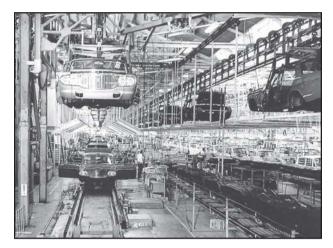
Passenger car assembly hires at a plant of the Motor Company in Japan
